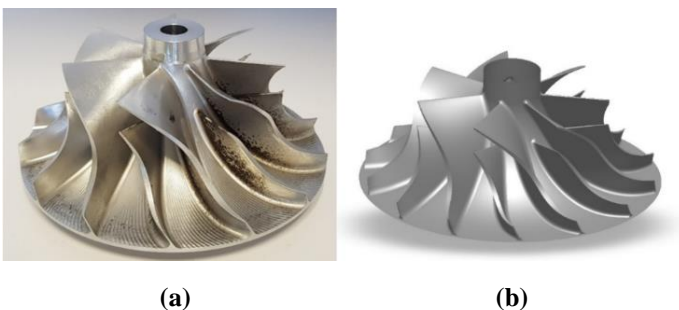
(a) K31 impeller and (b) scanned impeller result
